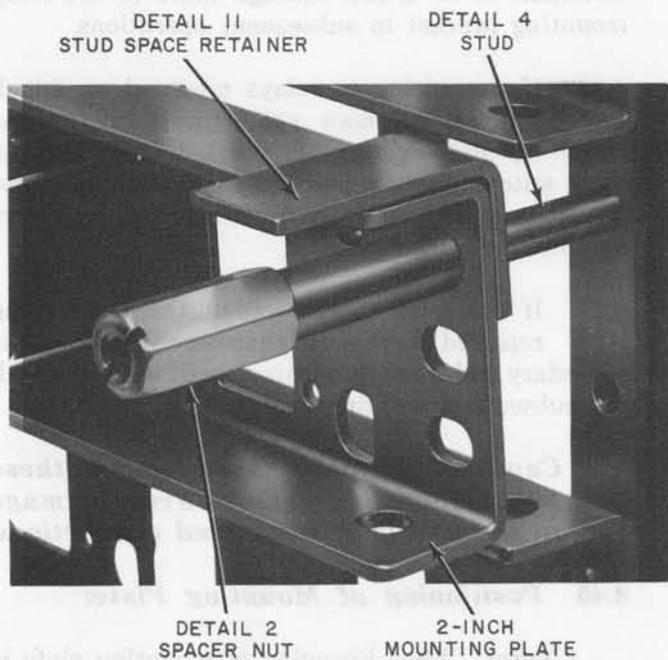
Detail 4 Stud in Place With Detail 11 Stud Space Retainers
